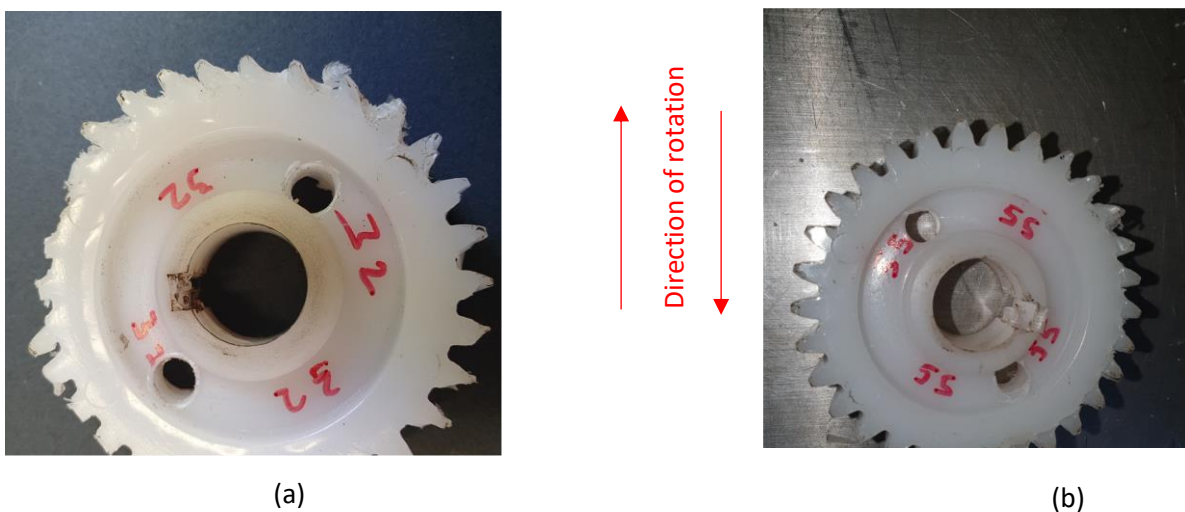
(a) Fracturing of teeth for driven gear at the pitch line for 65°C gear.
